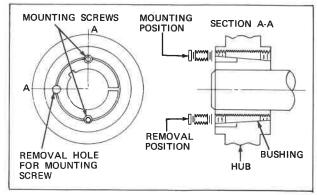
TAPER LOCK HUB AND BUSHING.
